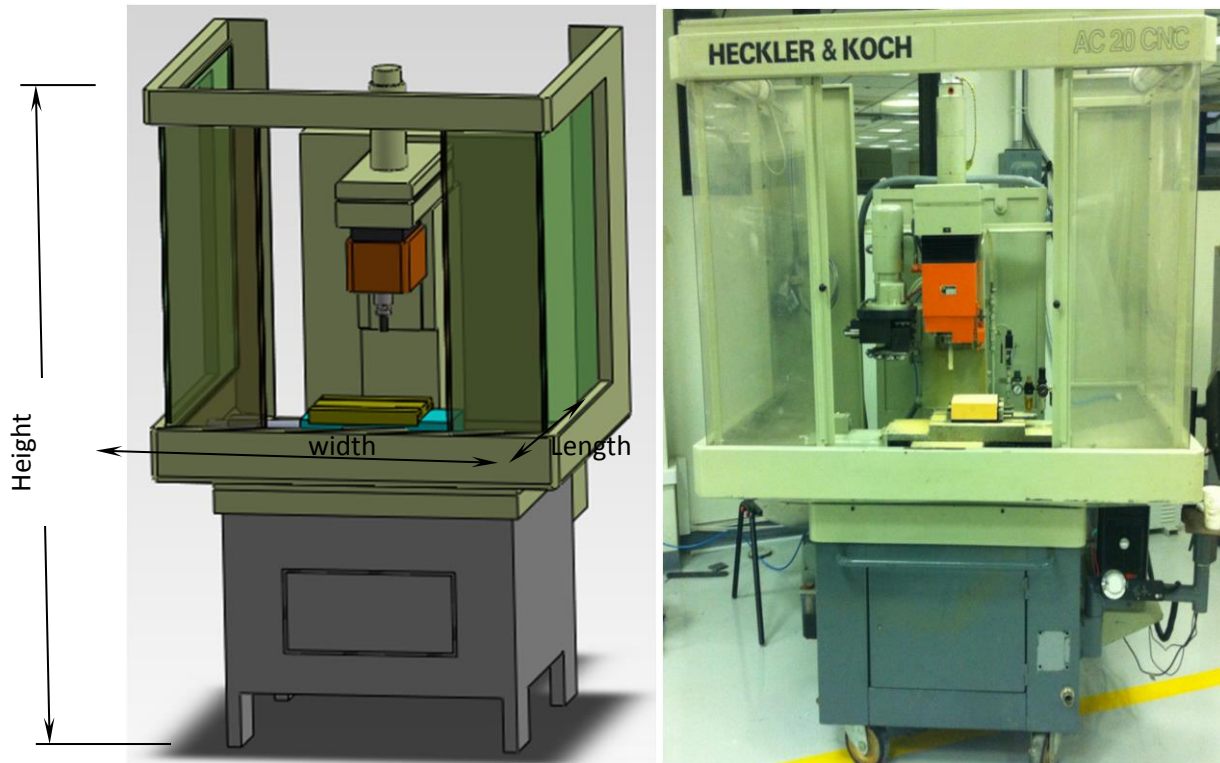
General layout for 3D assembly model for CNC Vertical milling machine.
